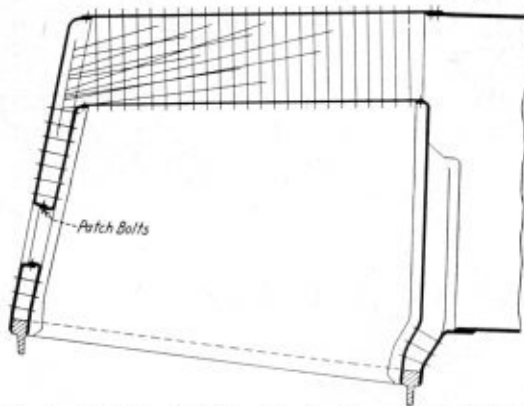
Method of Drilling Firedoor Laps for Patch Bolts
